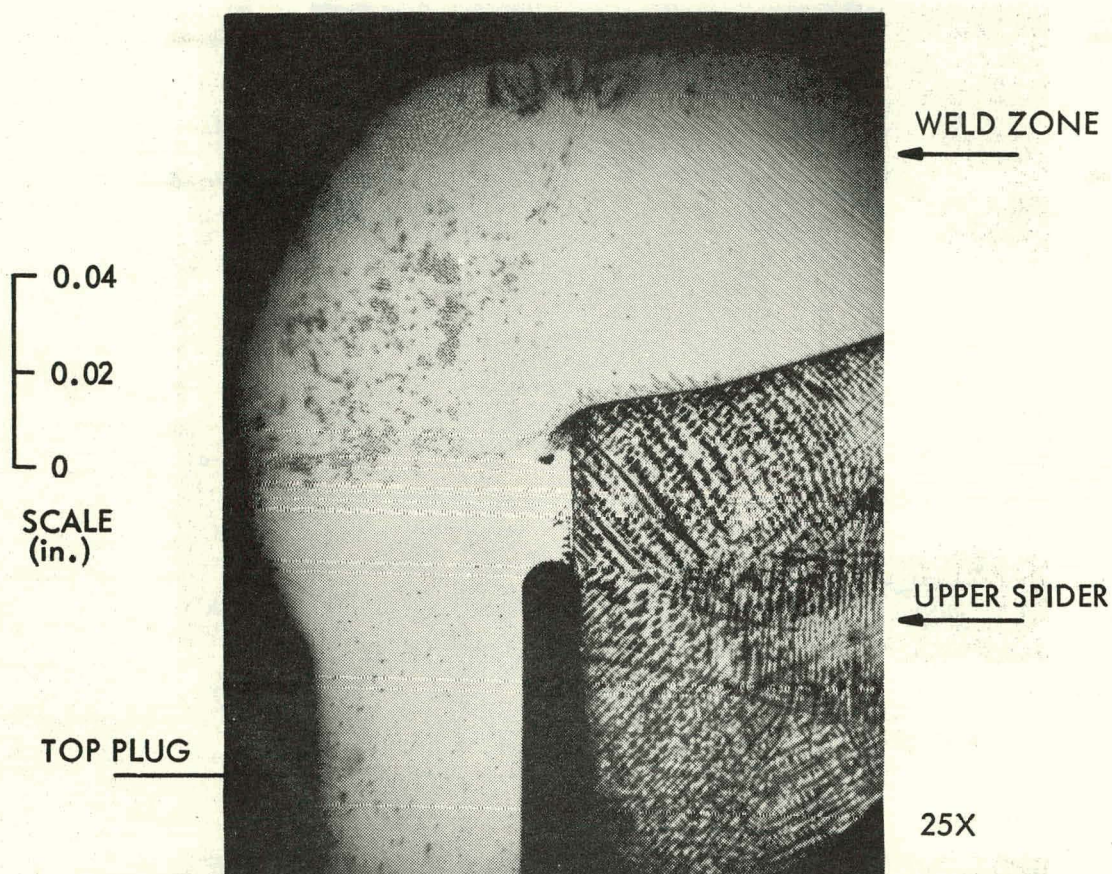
LONGITUDINAL VIEW THROUGH ML-1-I, S/N 11 UPPER SPIDER: TOP PLUG WELD ZONE
